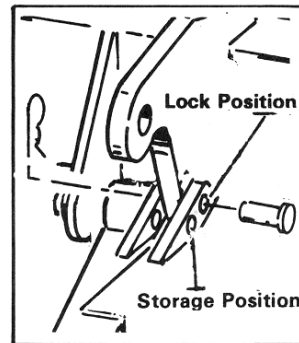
Transport Locking Pins Fig. 31 Wing Tube Jack Mount
